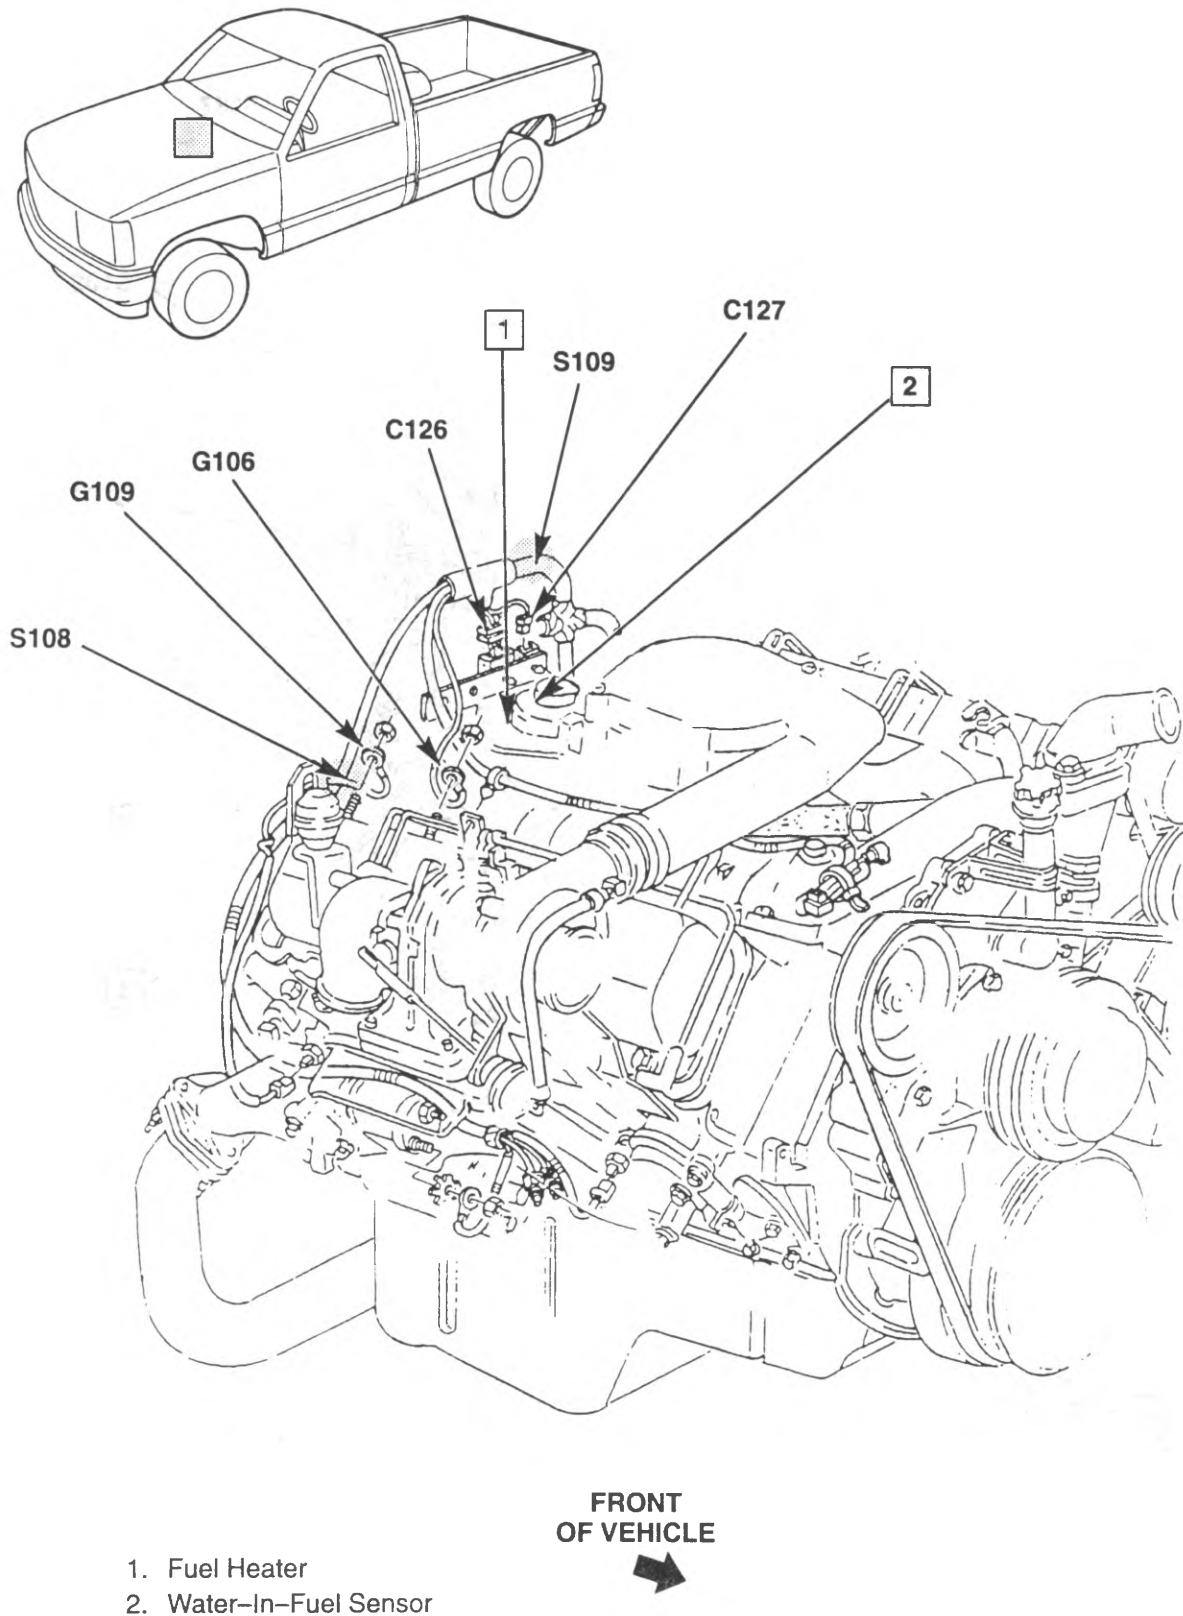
Turbo Diesel Engine Wiring, RH Side
